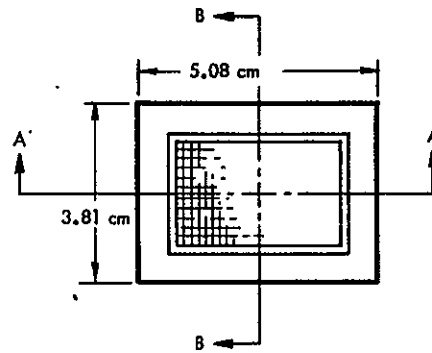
4-inch J₊ and Piggy-Back Probe Dimensions
